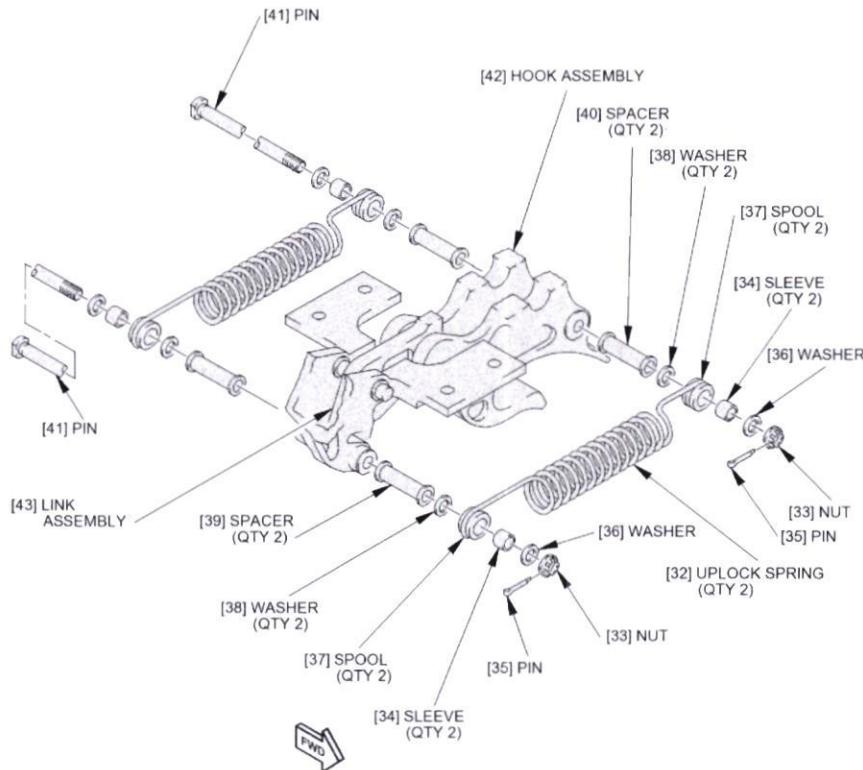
Main Landing Gear Uplock Assembly Installation - Sheet 2
